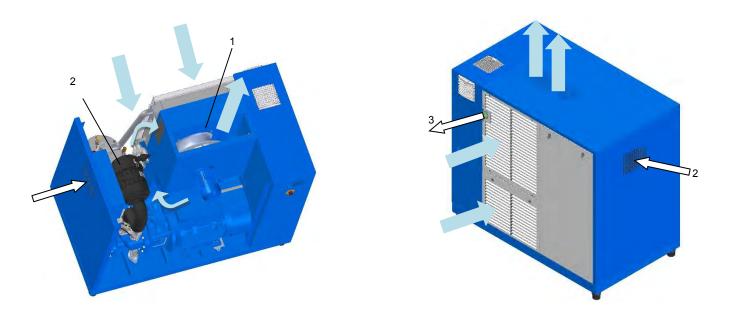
Flow chart for screw compressor G/V Drive 38 - 45, 56 - 75
